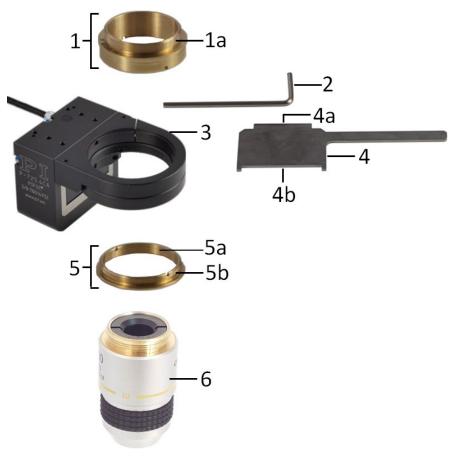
P-721.xxA thread adapter with PIFOC positioner and microscope objective
